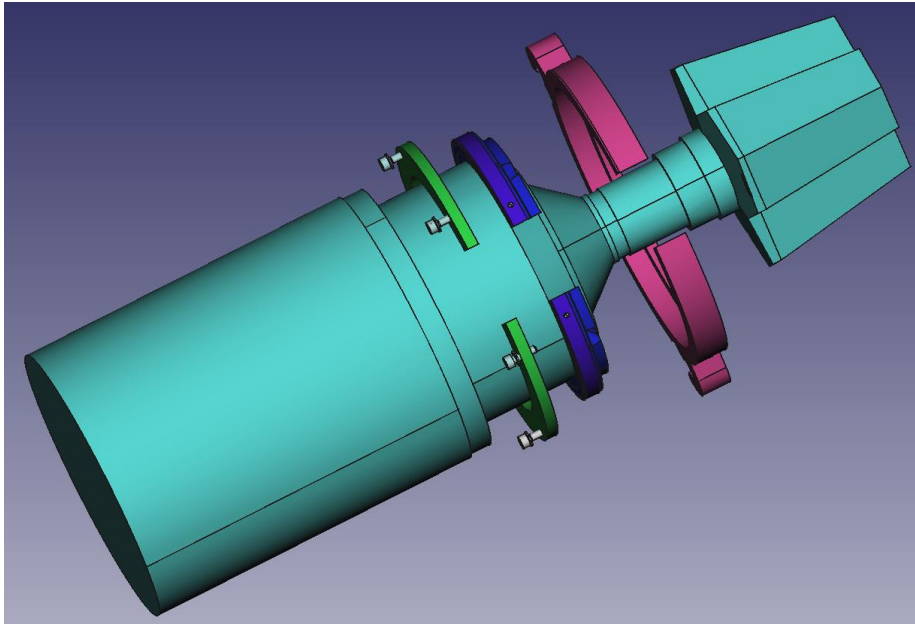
The old cryostat with its mounting rings. The pink ring is part of the frame. When mounted the green part bolts onto the pink part, sandwiching the blue part, which is bolted onto the detector, but can still rotate.
